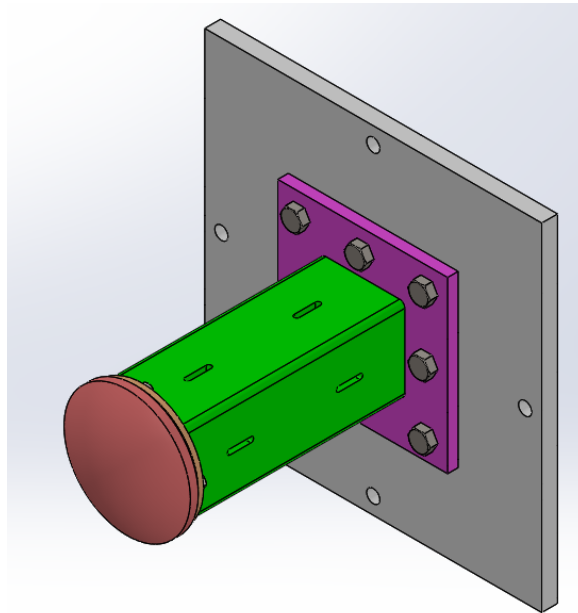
Rigid Indenter Full Assembly, Isometric View.
